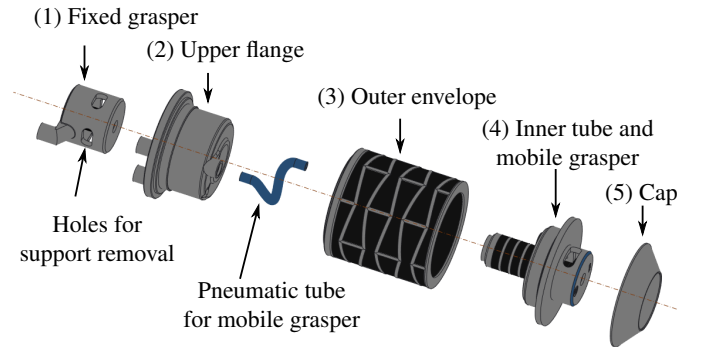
EXPLODED VIEW OF THE ACTUATOR.
